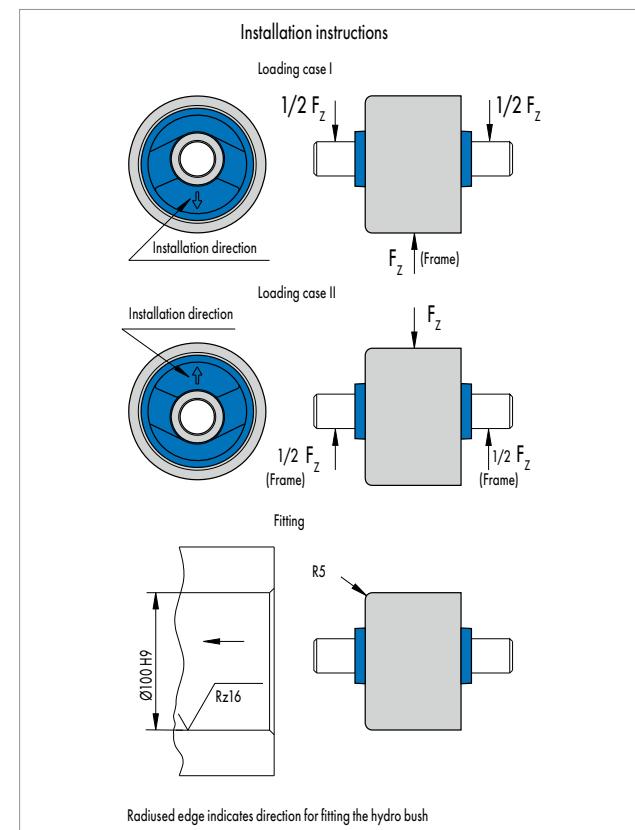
Fitting &amp; installation instructions: Hydro Bushes
